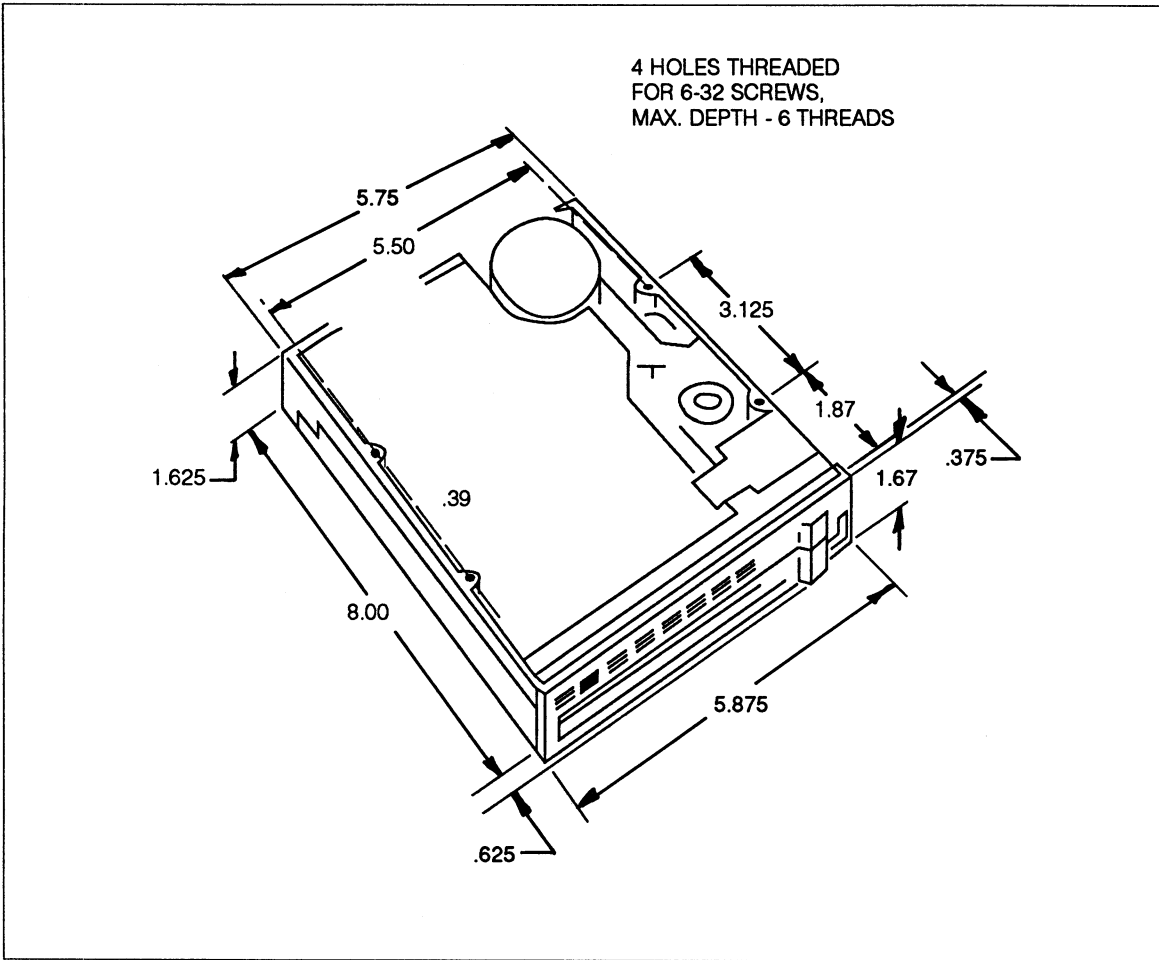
Cartridge Tape Drive Dimensional Drawing
